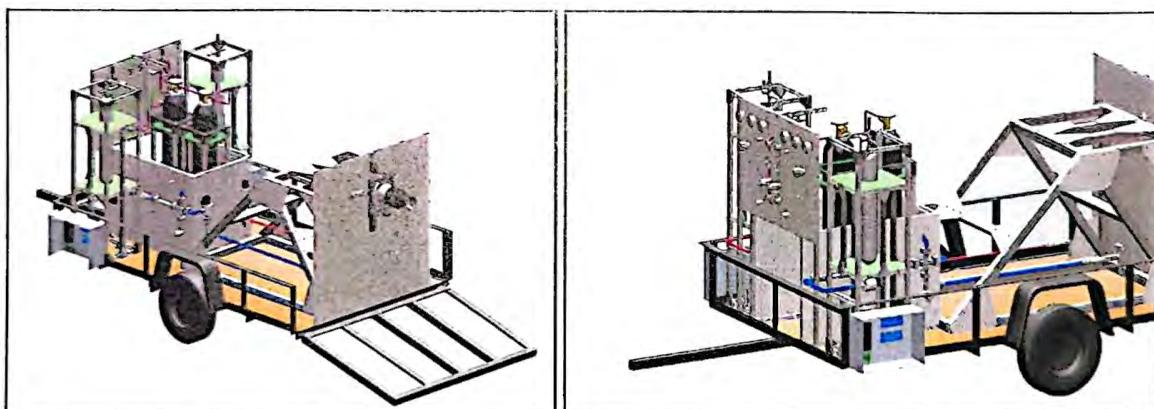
Isometric views of the test stand trailer, equipped with all required components.
